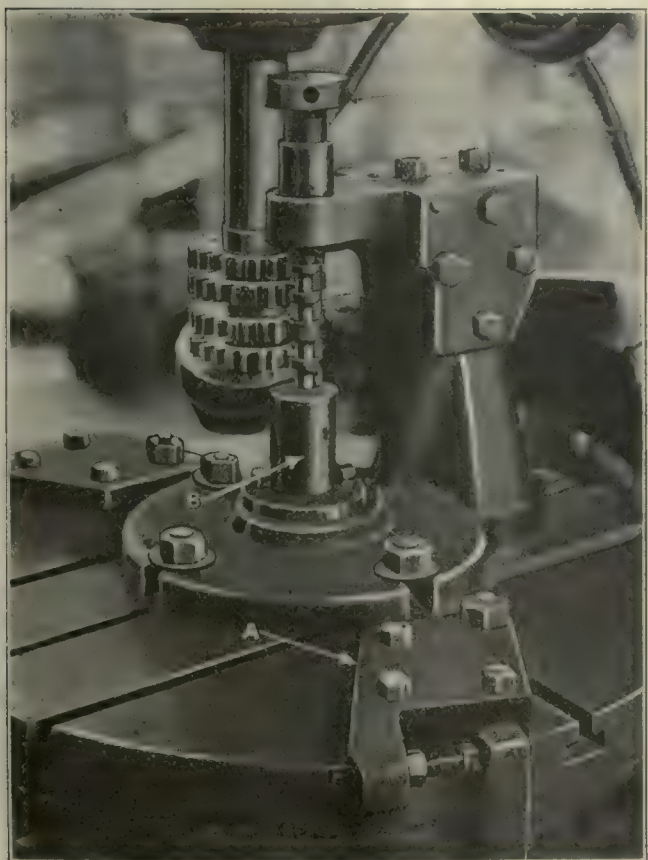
MILLING VALVES ON A VERTICAL MILLING MACHINE
